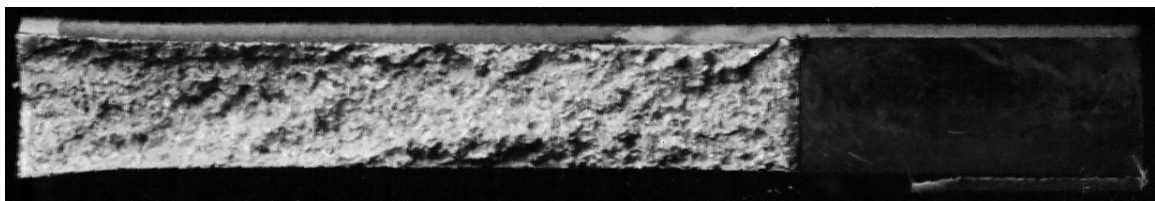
Fracture surface of side-grooved Timetal 5111 specimen loaded dynamically.
